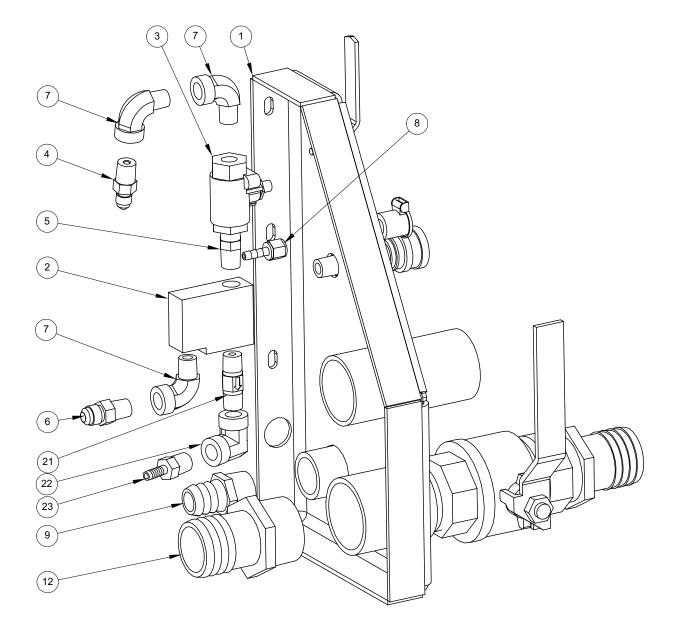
Dump & Vacuum Bracket Assembly - Rear D-5520 Rev D
